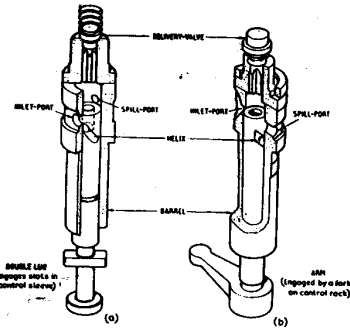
Part sectional views of Simms fuel injection pump elements. (a) A-group element; (b) B-group element.
